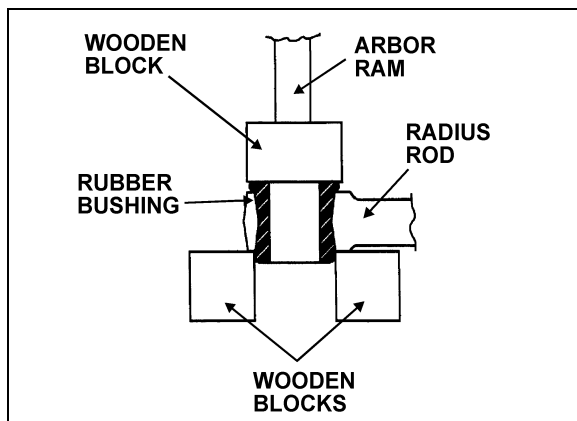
RADIUS ROD BUSHING INSTALLATION 16012
